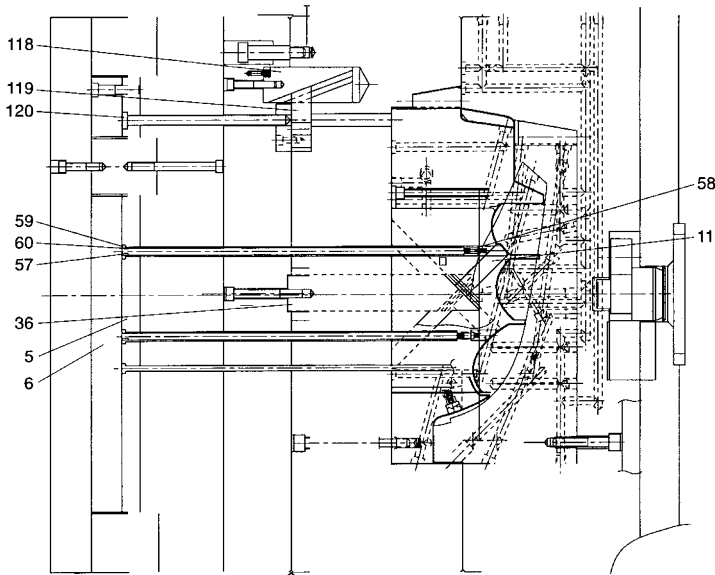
Injection mold; 5, 6: ejector plate; 11: displacing split; 36: control bar; 57–60: sleeve ejector; 118: control bolt; 119: control slide; 120: bolt
